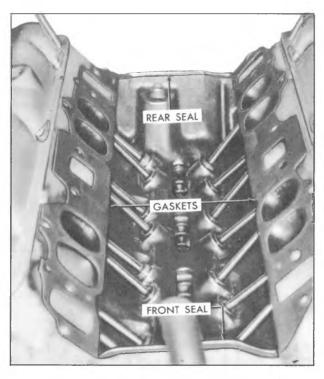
A-9V-Intake Manifold Gasket Seal Location
